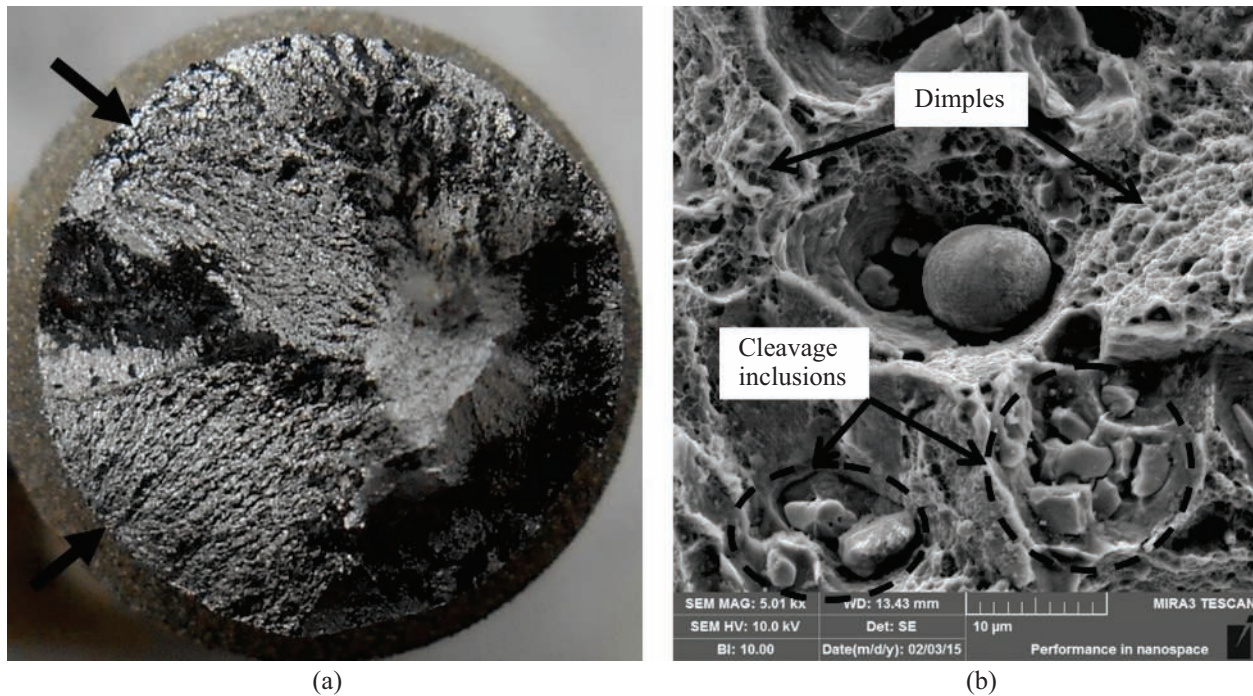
Fractographs (a) Multi-site crack initiating from white layer (10x), (b) Nature of fracture (5000x)
